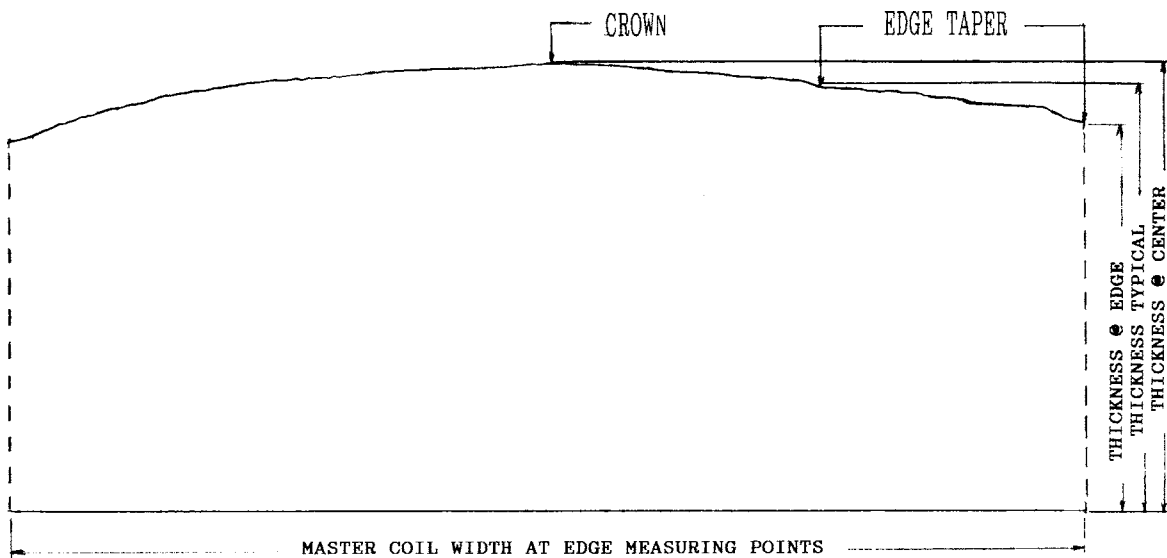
Typical Steel Mill Coil Thickness Profile across Width of Coil
